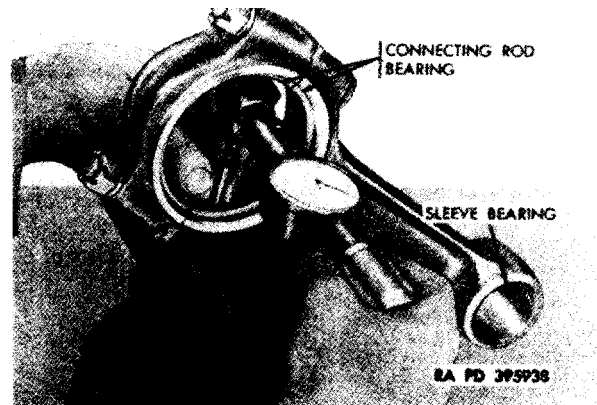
Checking connecting rod bearing bore using dial bore indicator.
